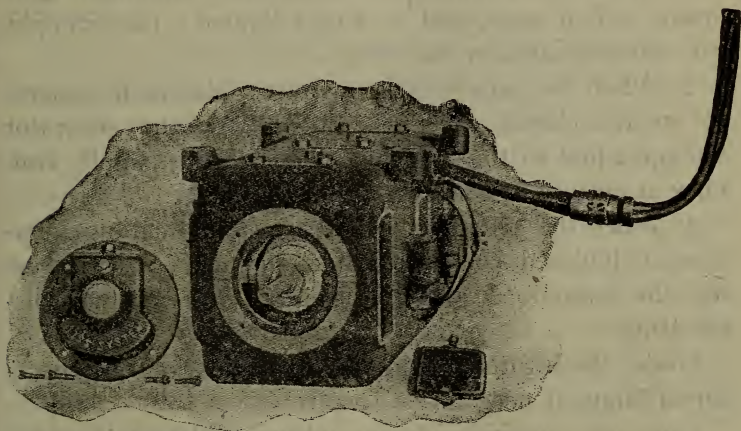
END VIEW OF BUCKER SHOWING COMPLETE COUPLER HEAD AND BLOCK AND METHOD OF CONNECTING CAR WIRES. BEARING HEAD AND HAND HOLE COVER REMOVED EXPOSING MOTOR COMMUTATOR.
